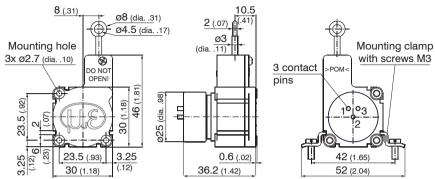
Dimensional drawing WPS- ... -50MK30 with potentiometer or encoder, dimensions in mm (inches), not to scale
